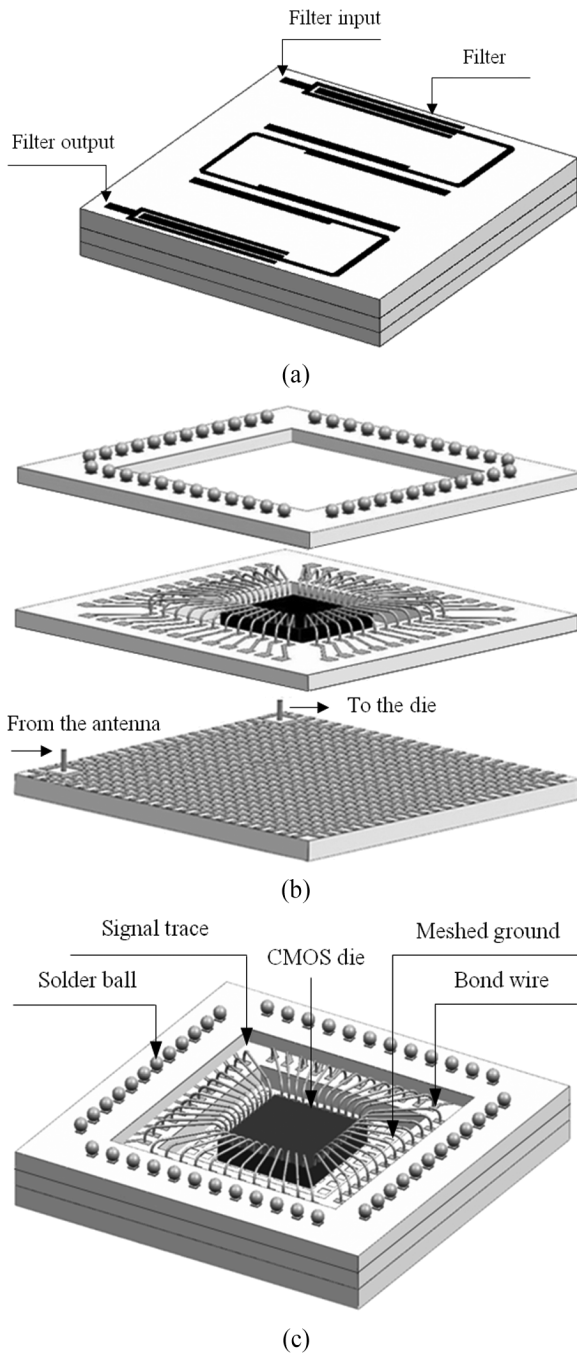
Integrated dual-band bandpass filter. (a) Top view. (b) Exploded view. (c) Bottom view.
